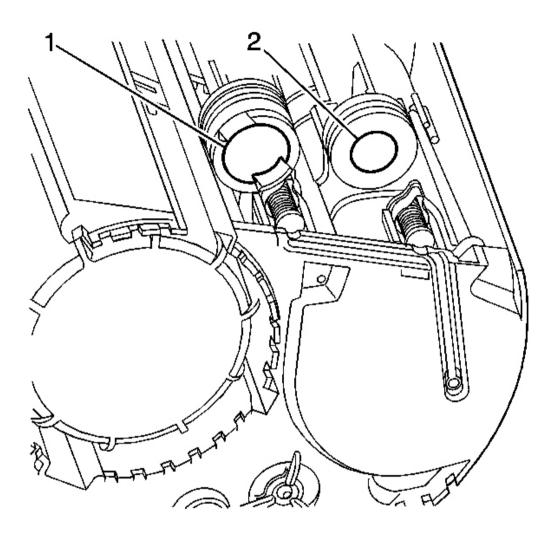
View Of Primary & Secondary Jet Pumps Courtesy of GENERAL MOTORS CORP.
